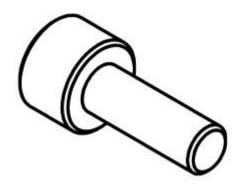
INSERT, CRANKSHAFT - 8450 Courtesy of CHRYSLER LLC
